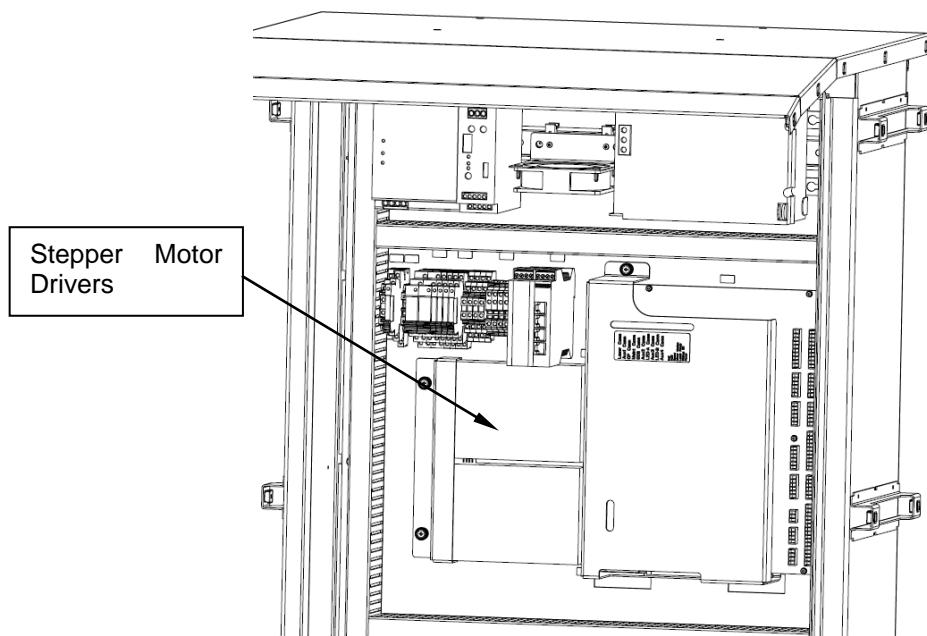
T2/3 STEPPER MOTOR DRIVERS
